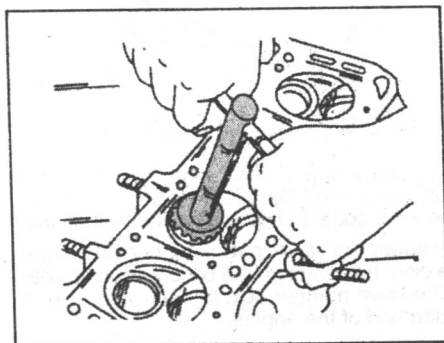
Re-cutting a valve seat. Rotate the cutter with even pressure.
